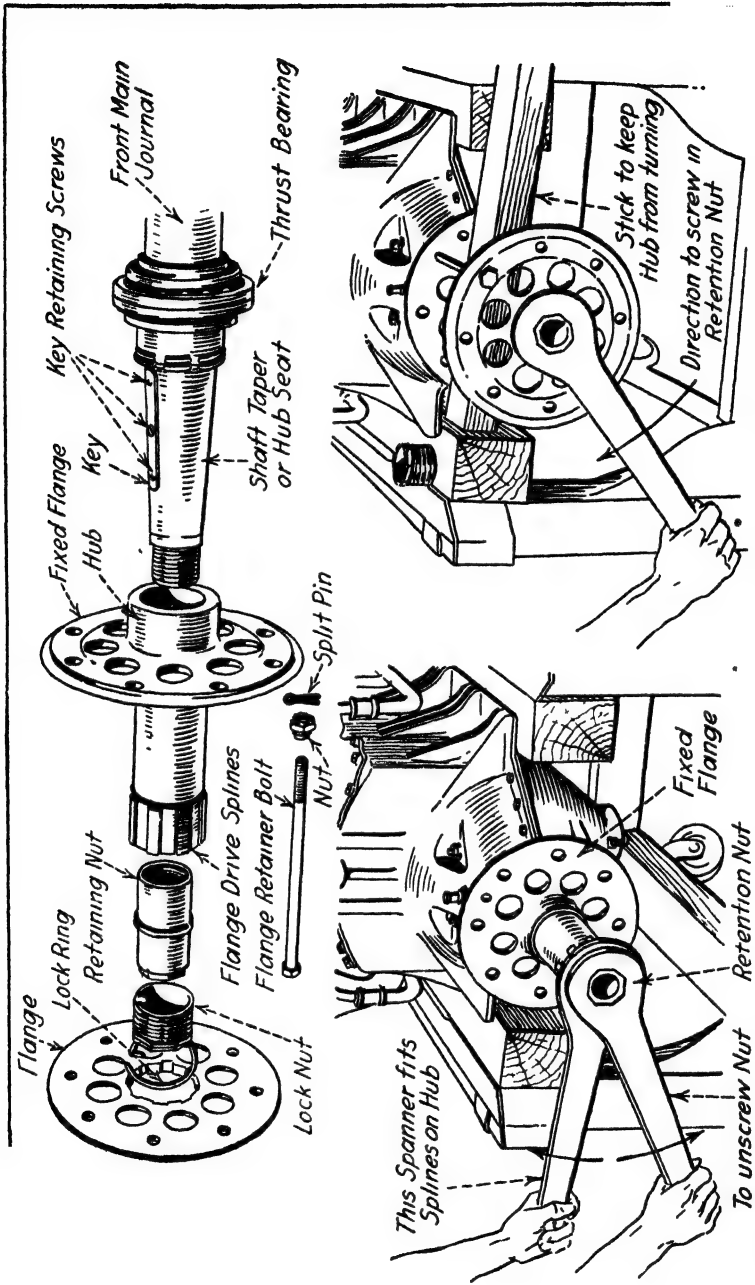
How the Propeller Support Hub is Mounted on the Crankshaft of Liberty and Similar Engines.
